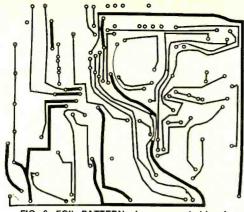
FOIL PATTERN of component-side of PC board. Actual board measures 5 x 4¹/₄-inches.
